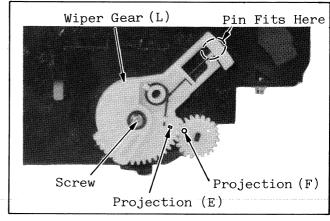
Adjustment of Cassette Up Gears-(9)
